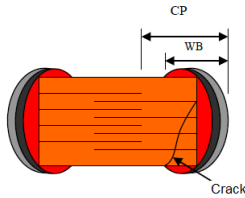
Open-mode design (CP>WB) circuit open during cracking.
